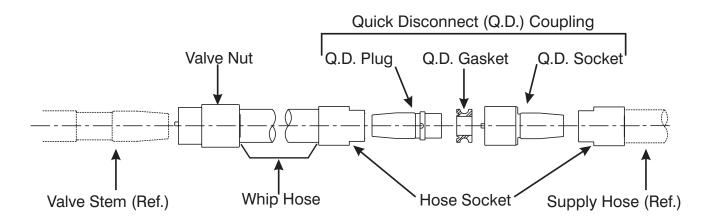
Whip Hose Components and Quick Disconnect Fittings.
